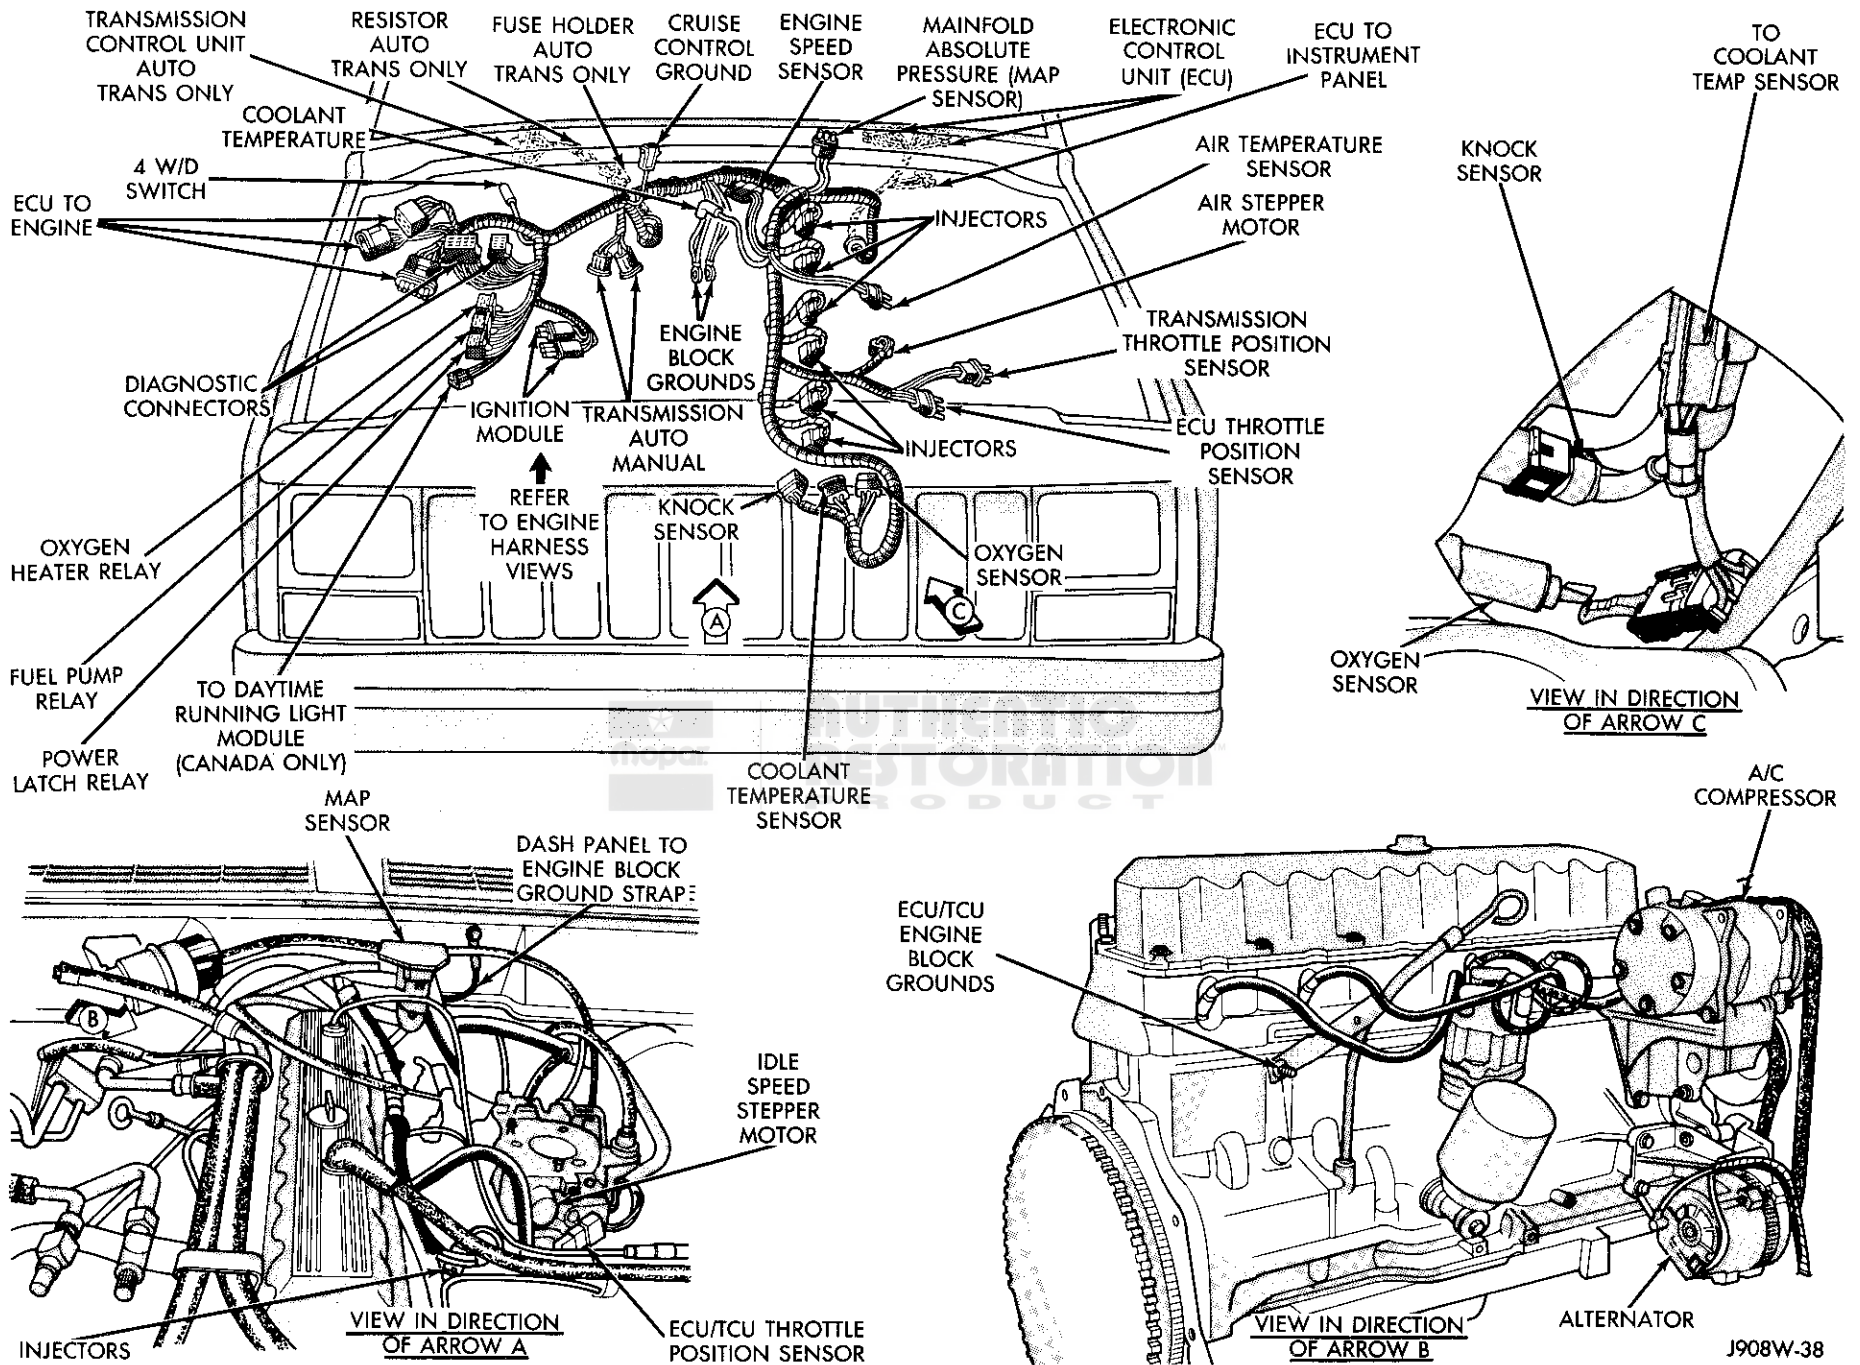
Engine Wiring 4.0L Engine - MJ, XJ
